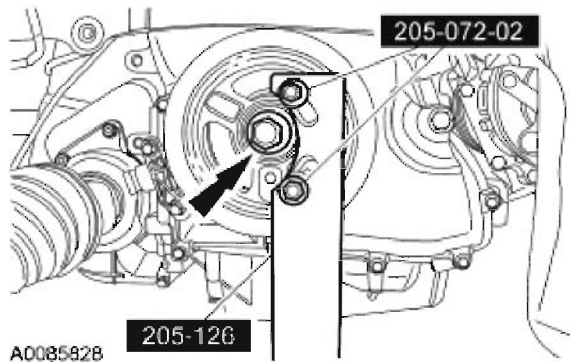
Locating Special Tools (205-072-02, 205-126)
